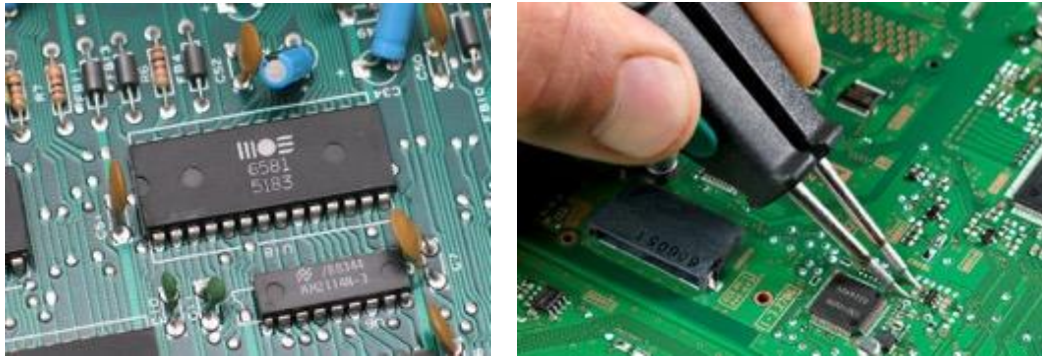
(a) Through-hole devices mounted on the circuit board. fig.1(b) Surface-mount Components.
